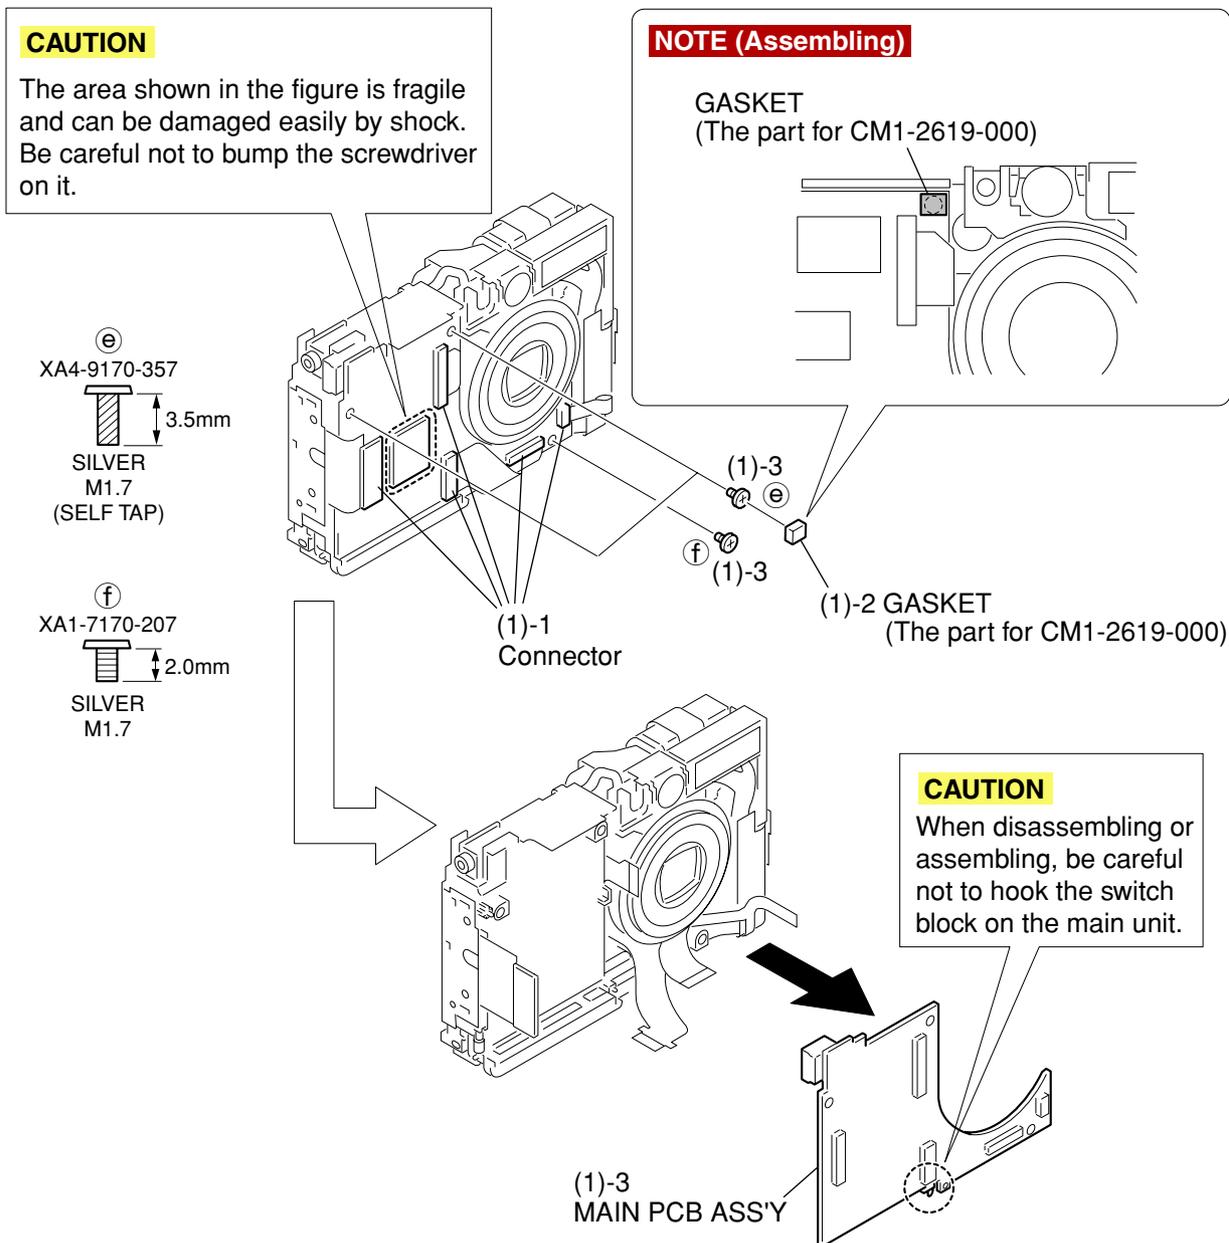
MAIN PCB ASS'Y, GASKET (The part for CM1-2619-000)
